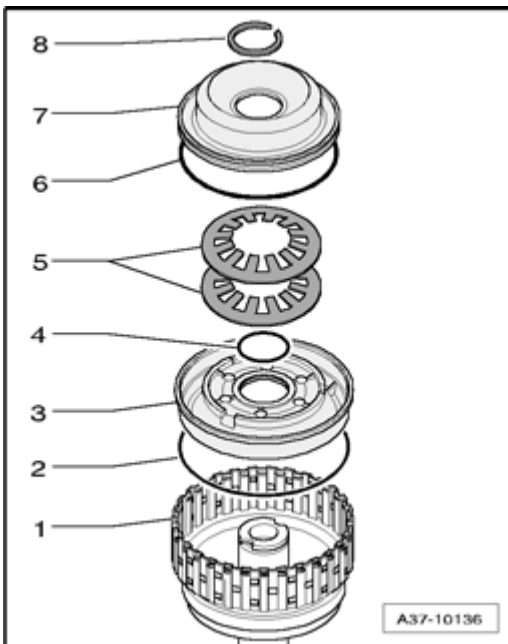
Cylinder "A", O-Rings, Piston "A" And Dished Washers
